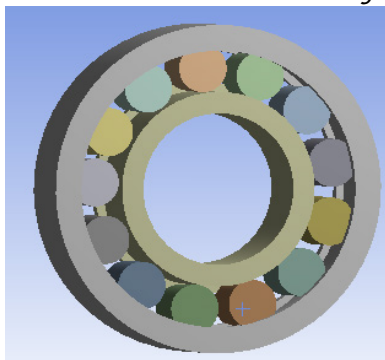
Appearance a cylindrical roller bearing for the bearing assembly wheel for railway
